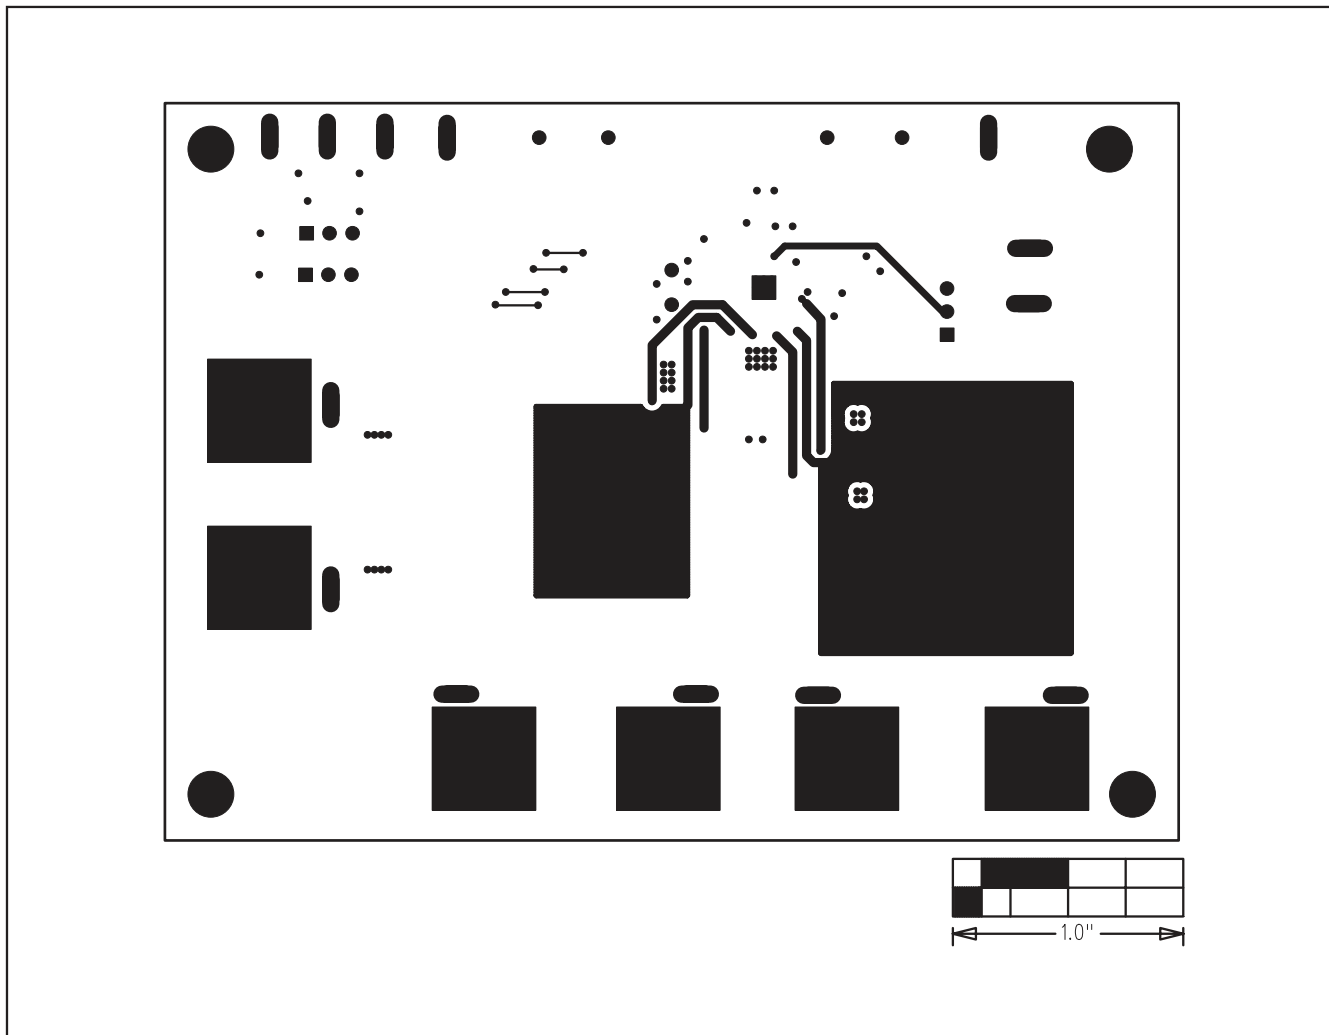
MAX15023 EV Kit PCB Layout—Solder Side
